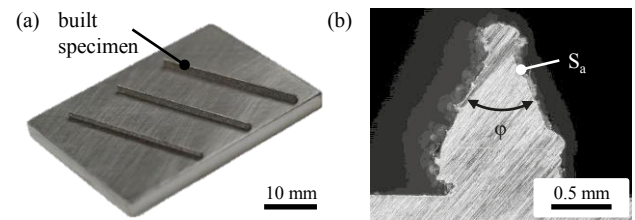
(a) Built linear specimen; (b) Cross section of SLM built specimen.
